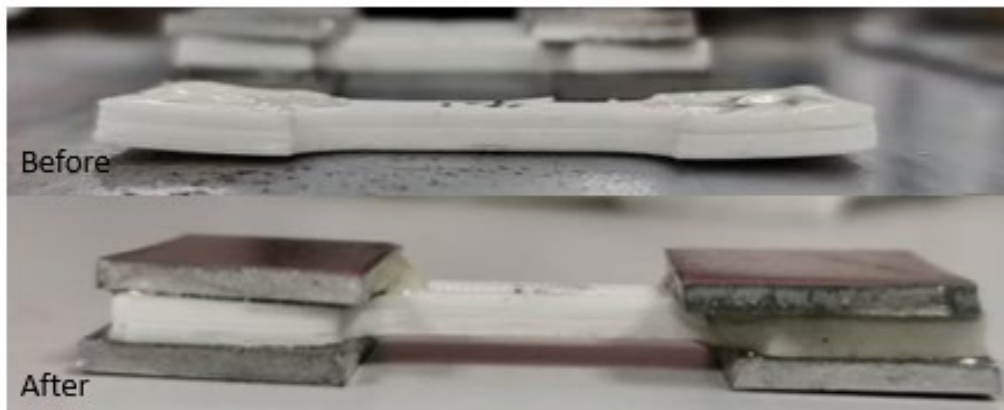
Example of Before and After Adding of Aluminium Plate on Tensile Test Sample
